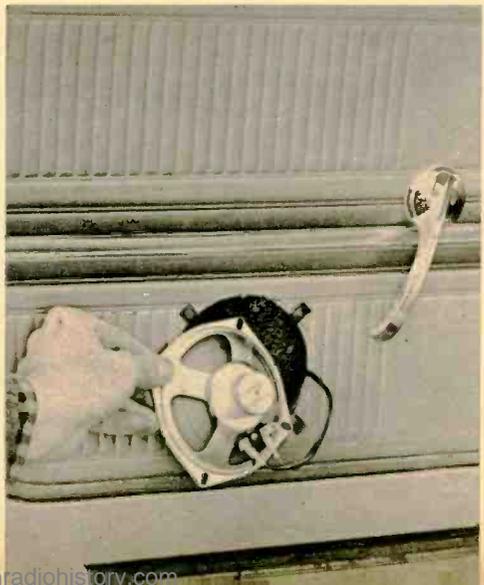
Insert speaker into cutout to locate mounting holes. Drill screw clearance holes then insert tinnerman nuts. Wires get connected next.
